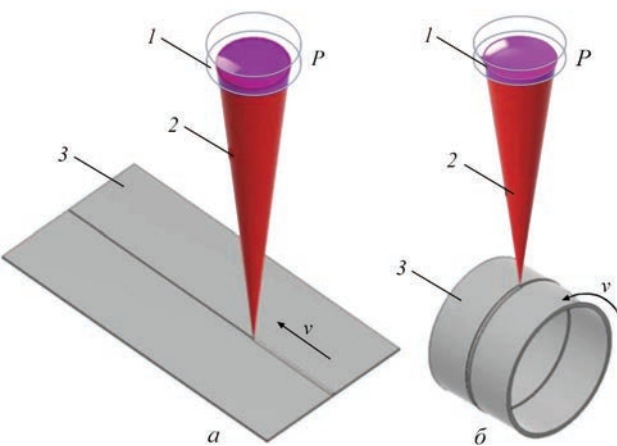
Schematic of laser welding: butt welds (a), circumferential welds (b): 1 — lens; 2 — laser beam; 3 — workpieces
